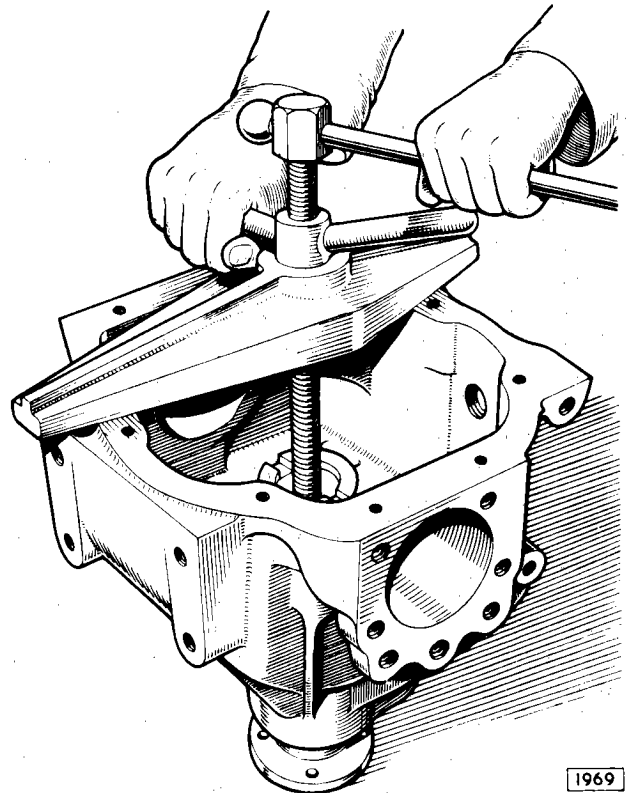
Removing the pinion inner bearing outer race using Churchill tool SL. 12 with adaptor SL. 12 AB-4
